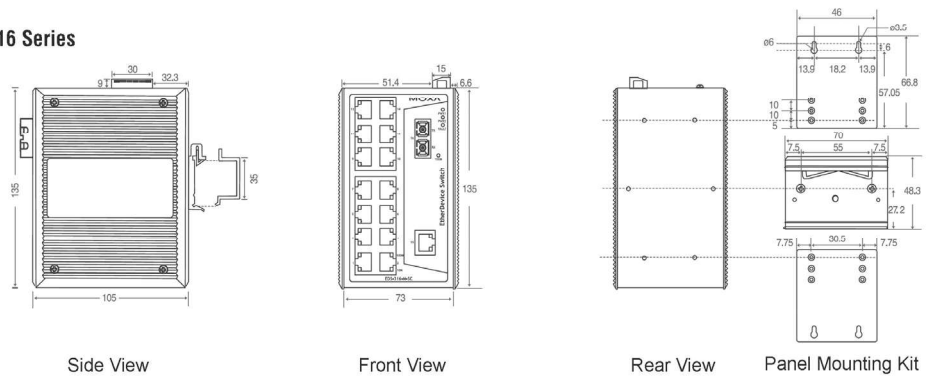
MOXA switch type approved EDS-305/308/316 series dimensional drawing
